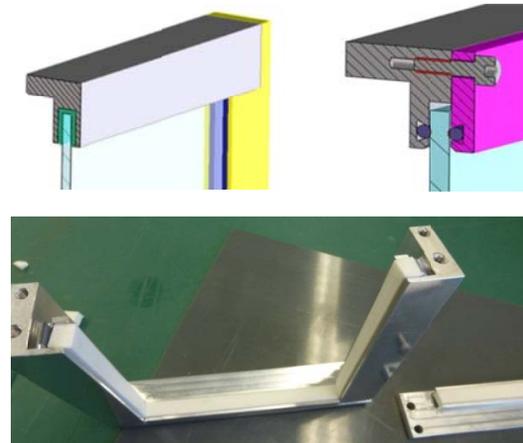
Top: schematic view of sample design to test alternative edge sealants (left: U-profile rubber; right: "O"-ring); below: photograph of set-up for testing sponge rubber
